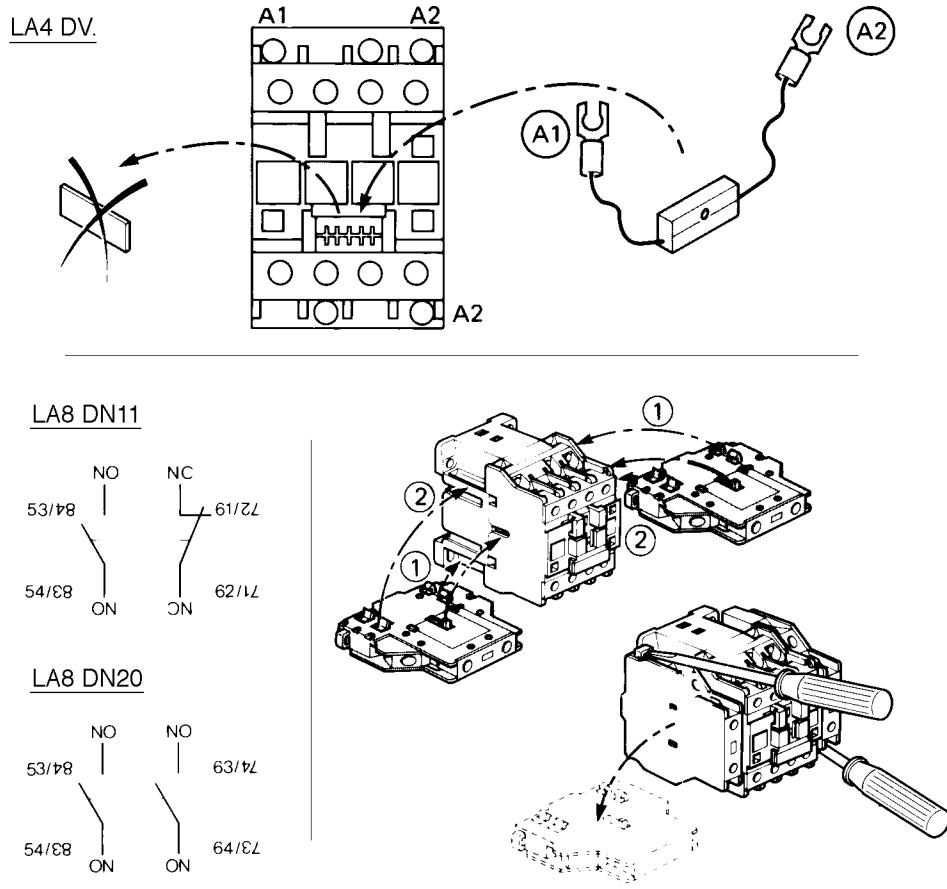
Mounting of Side Mounted Auxiliary Contact Block and Pilot Light to Contactor
